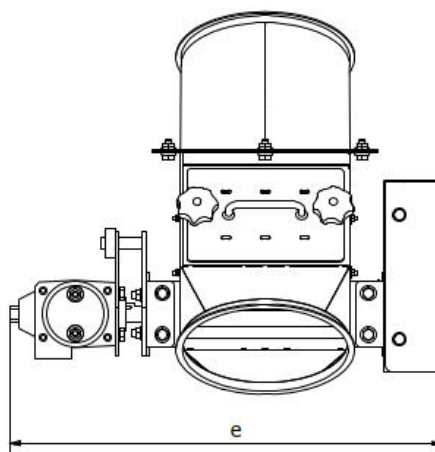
Side view -Asymmetrical with pneumatic motor (P-).
